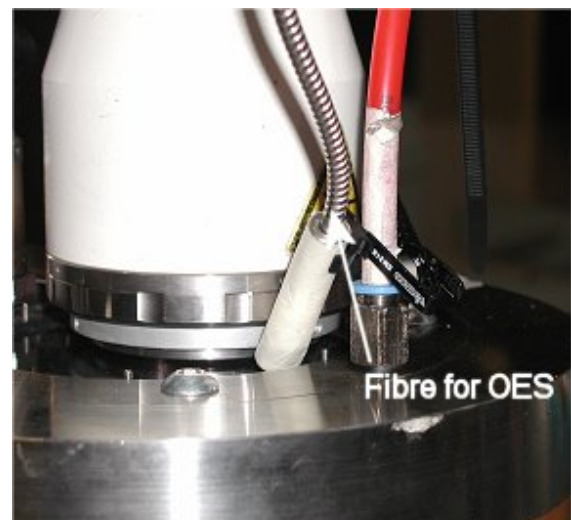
Laser optics and process gas chamber with fibre optic cable for OES
